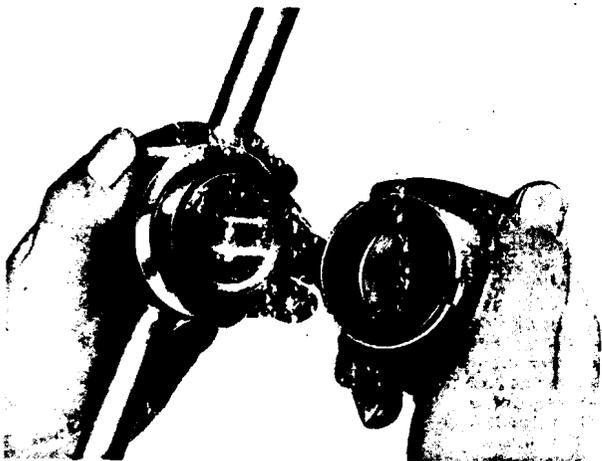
Combined assembling spanner for pressing the packing ring into the threaded ring
